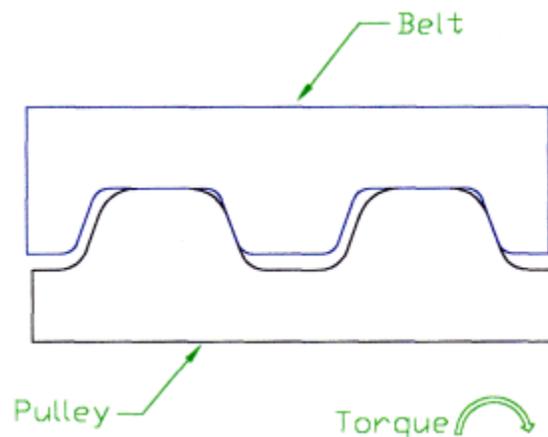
RMA 40° Belt Tooth and Pulley Engagement
